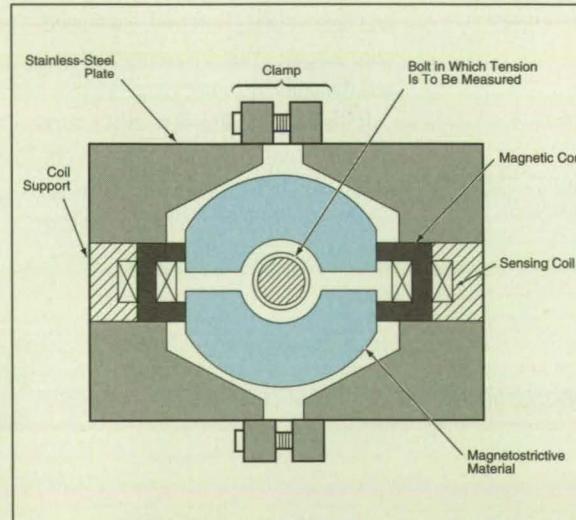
In this Bolt-Tension Sensor, two halves of the magnetic core of the sensing coil make contact with opposite ends of two crescent-shaped pieces of magnetostrictive material, which constitute a washerlike transducer assembly. Tension in the bolt causes a change in the inductance of the sensing coil. The washerlike transducer assembly resembles a regular flat washer and can remain under the bolthead permanently. Bolt tension can thus be monitored continuously, or the sensing coil can be moved to measure tension in various bolts.
